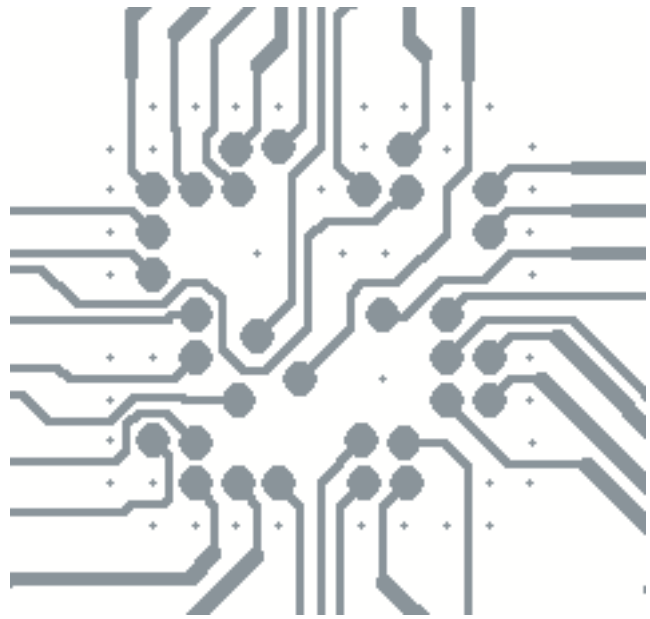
180-Pin μ BGA Six-Layer Board Routing Example (Four Routing Layers)—Second Inside Layer
